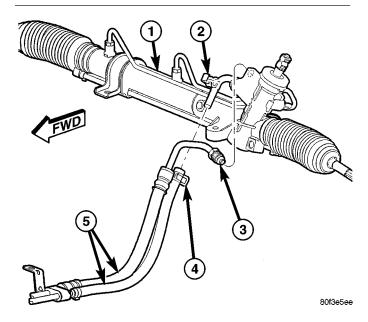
Hoses At Power Steering Gear - 2.4L Turbo
